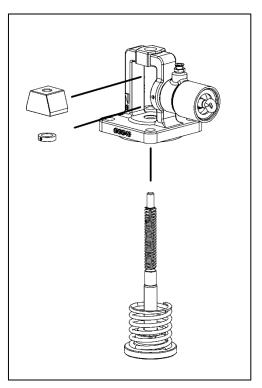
Remove setting nut and indication nut to be able to remove stem from bonnet.
